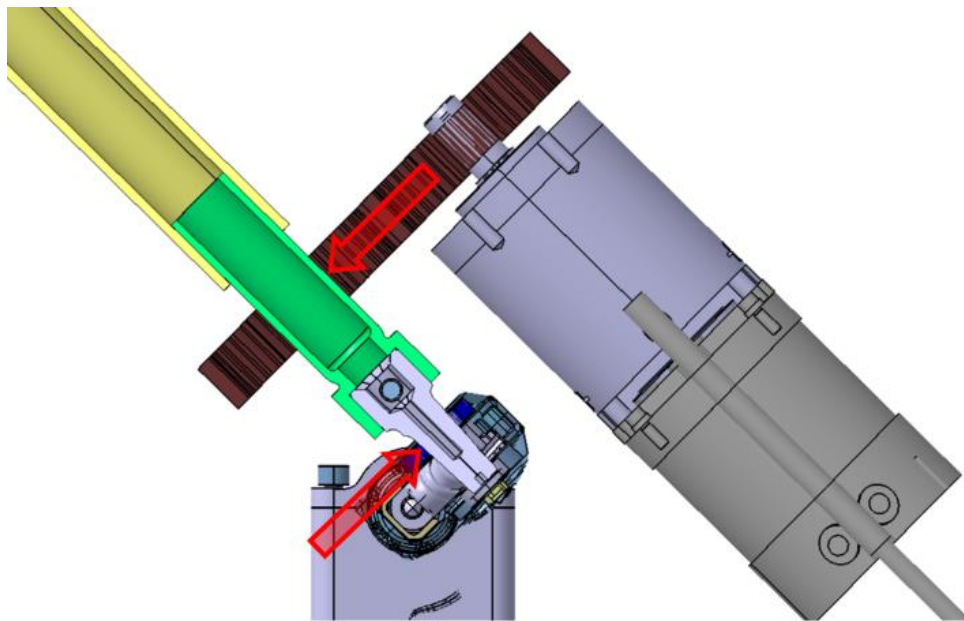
Force from the gear drive loading the pinion bearing – Solution 3
